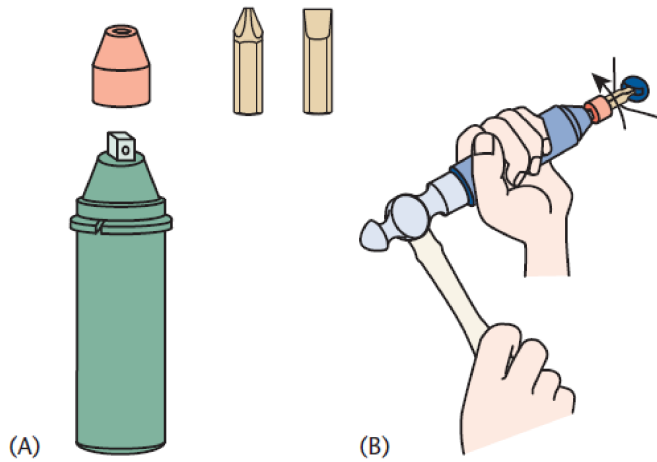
(A) An impact screwdriver set. (B) An impact screwdriver automatically tries to rotate the screw when it is struck with a hammer.
